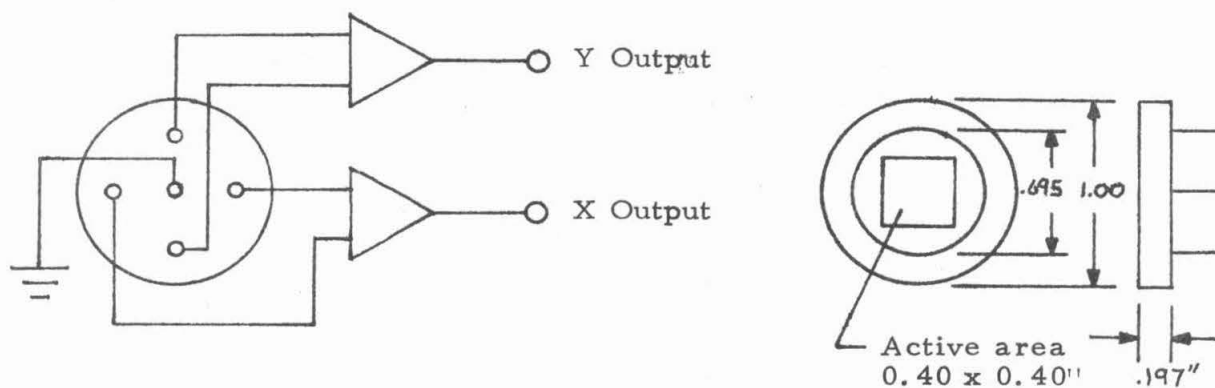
Wiring schematic and dimensional drawing of optical displacement detector
